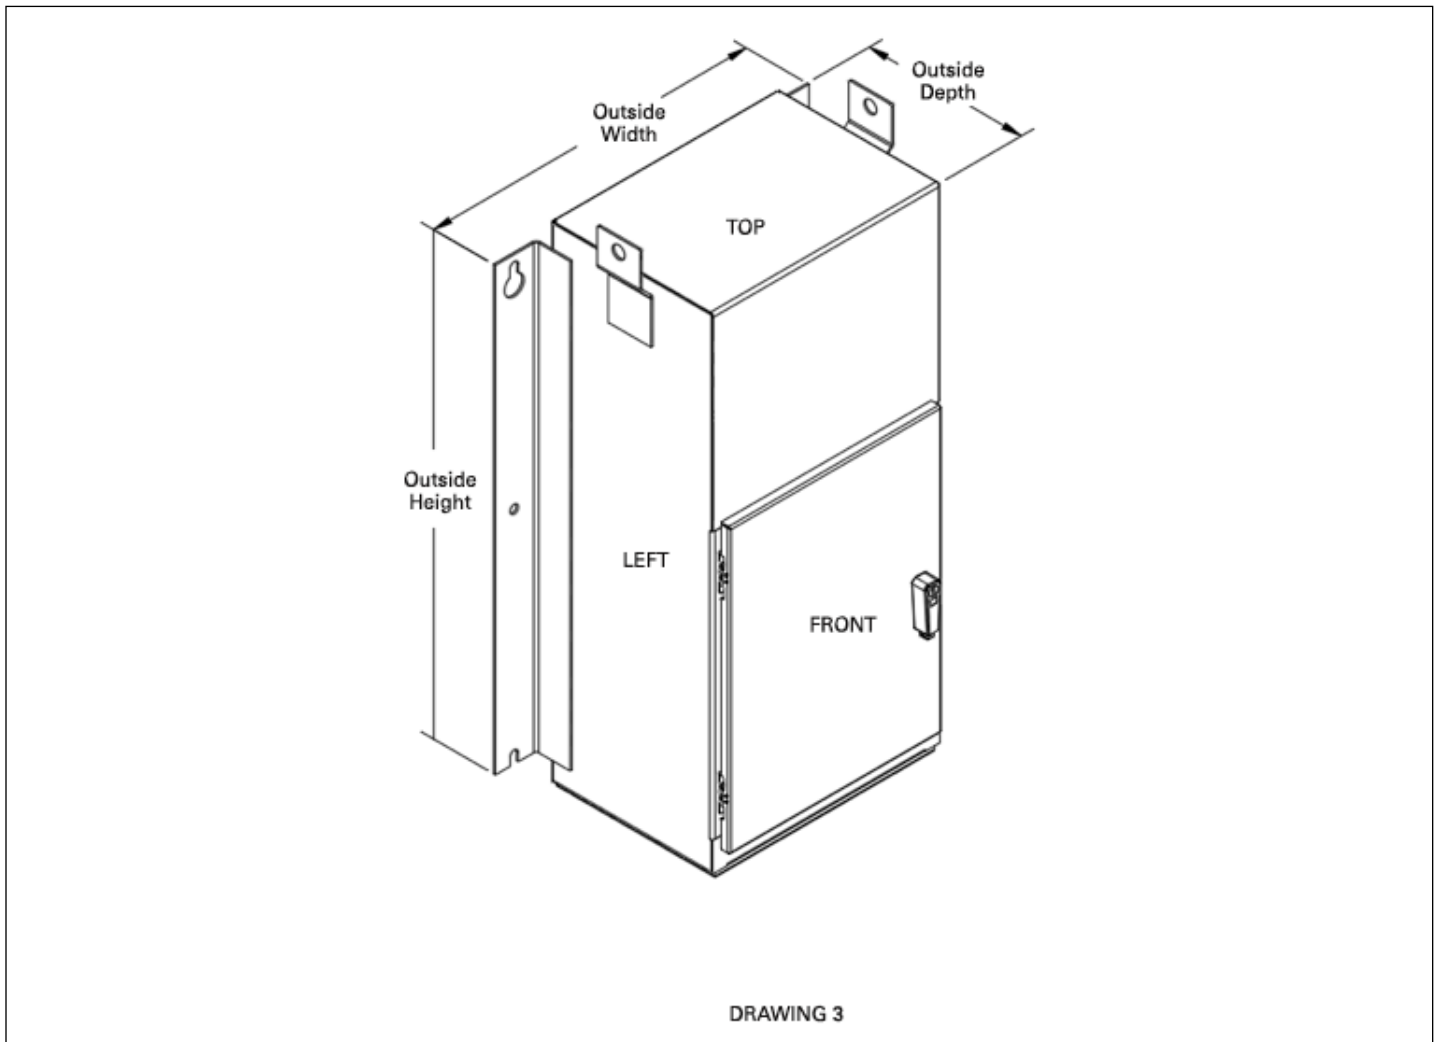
Enclosure Dimensional Drawing—Mini-Power Centers—NEMA Type 4X
